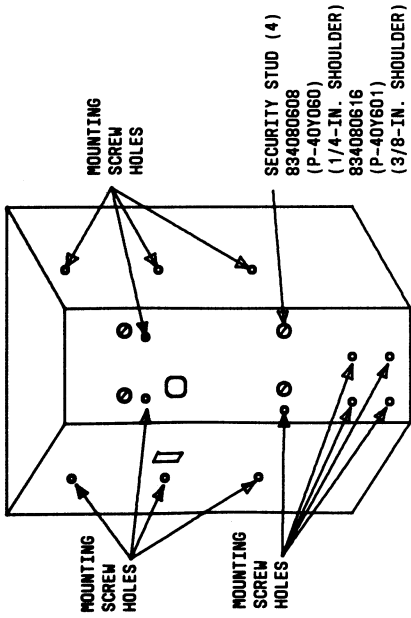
Location of Mounting Screw Holes and Security Studs In 2D-Type Set
